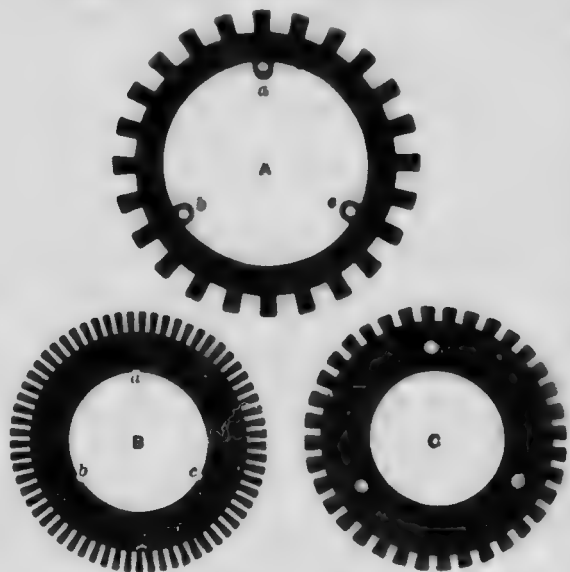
Core-Disc Stampings, Showing Methods of Driving.
